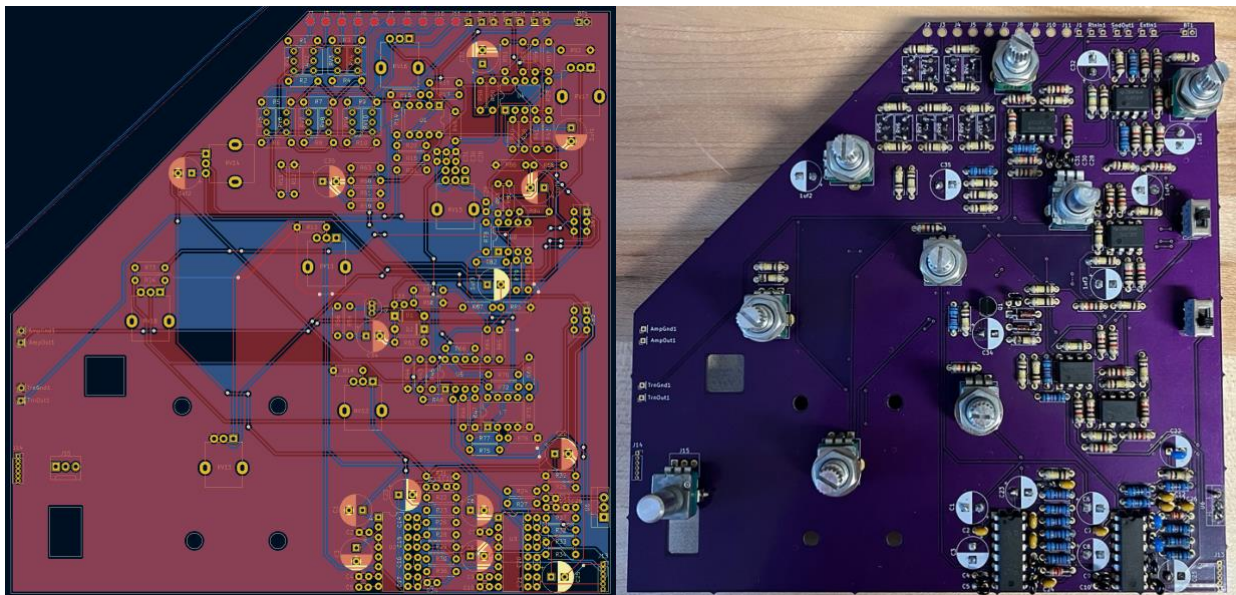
The PCB layout of the above circuit (left) and the populated board (right).
